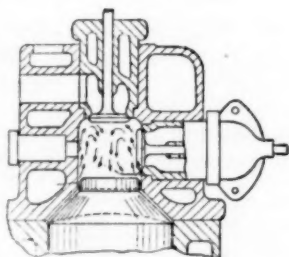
CROSSLEY-TYPE COMBUSTION CHAMBER
